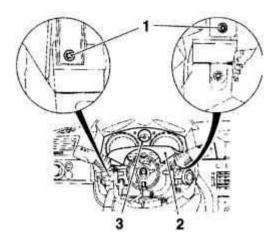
Removing the instrument cluster: 1 - bolts, 2 - the upper steering column shroud, 3 - a combination of devices
